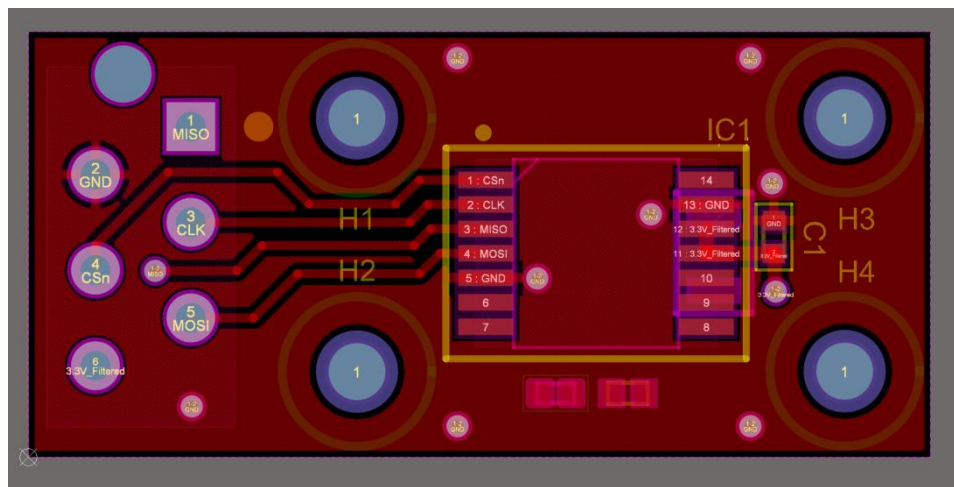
Front Layer Magnetic Encoder PCB Board View
